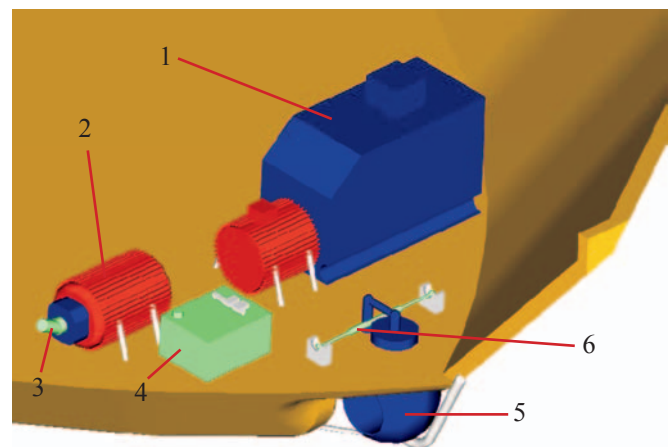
The proposed arrangement of main components of the barge propulsion and steering system : 1 – electric generating set; 2 – electric motor; 3 – hydraulic pump; 4 – oil tank; 5 – rotatable bow thruster; 6 – rotating mechanism of bow thruster's column.
